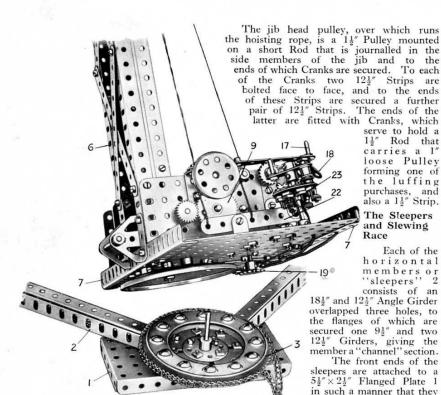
Partial side and underneath view of Swivelling Platform and Gear Box, showing details of the Slewing Race, etc.
